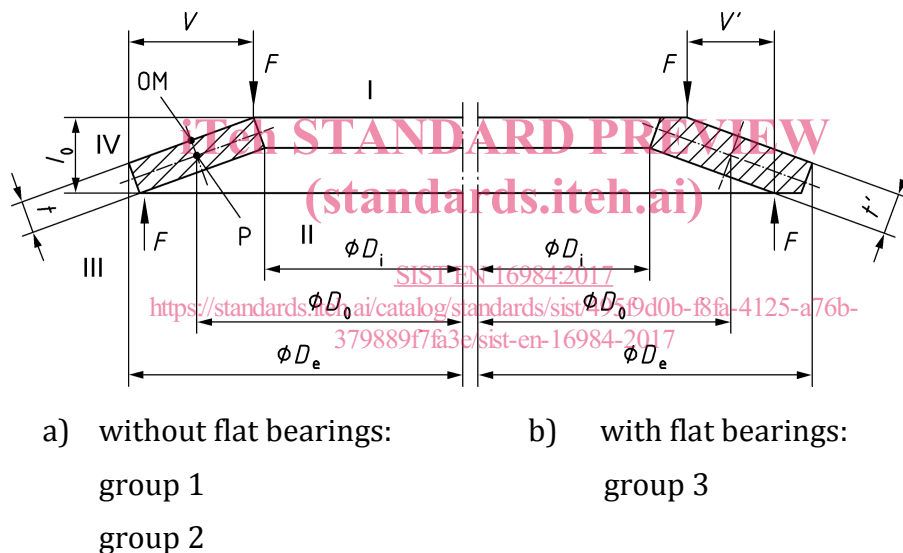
Single disc spring (sectional view), including the relevant points of loading
